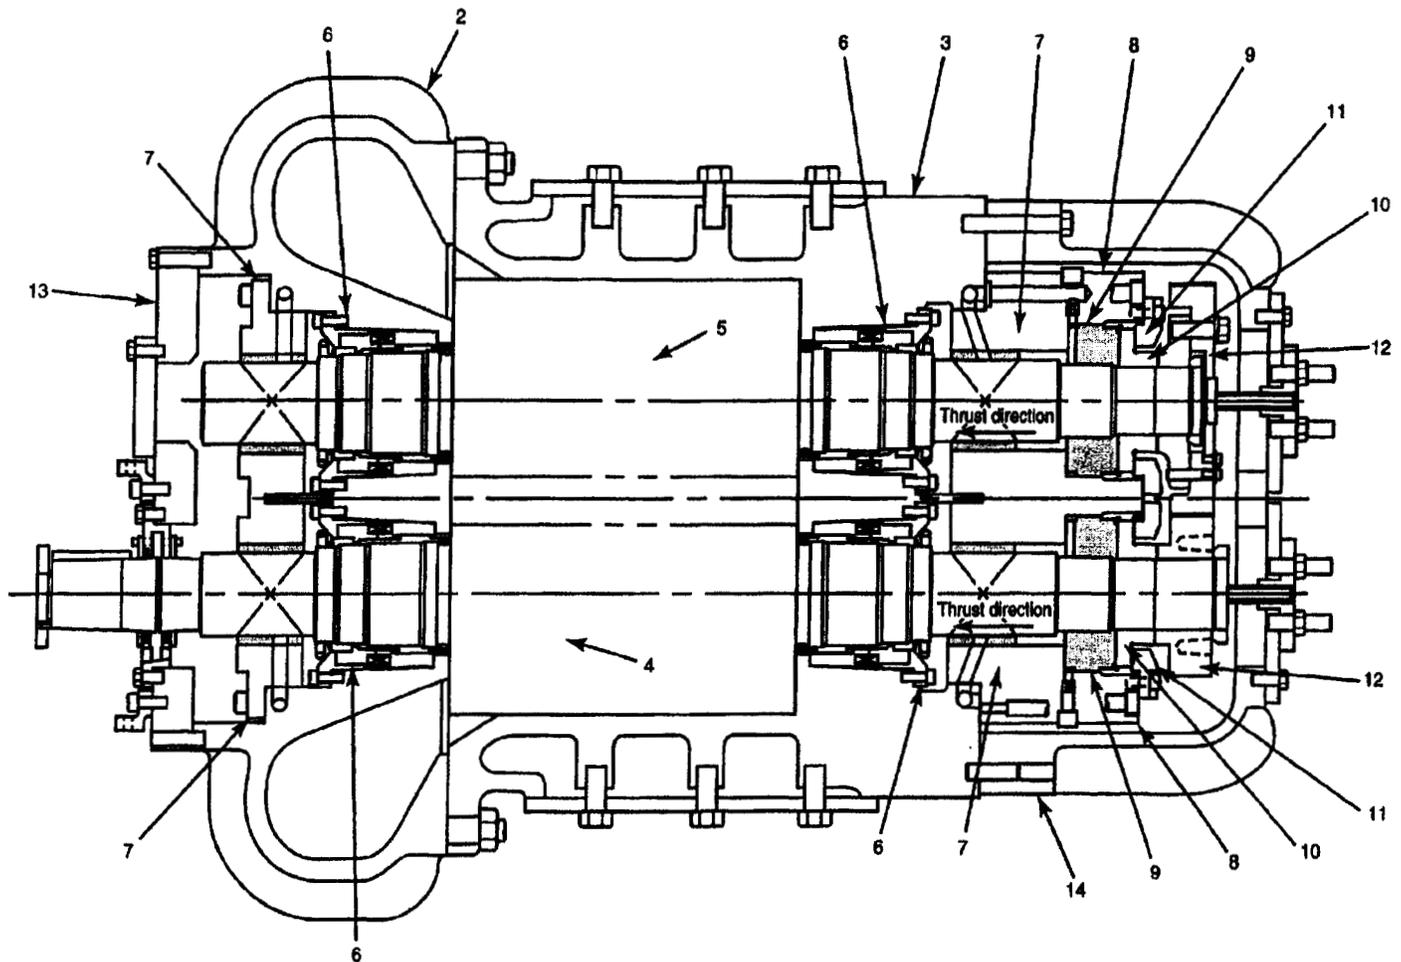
Cross-sectional view of dry screw compressor. Key: 1. compressor assembly, 2. housing inlet, 3. casing, 4. male rotor, 5. female rotor, 6. shaft seal, 7. radial bearing, 8. thrust bearing housing, 9. thrust bearing, 10. thrust collar, 11. thrust plate, 12. timing gear, 13. suction end cover, 14. discharge end cover.
